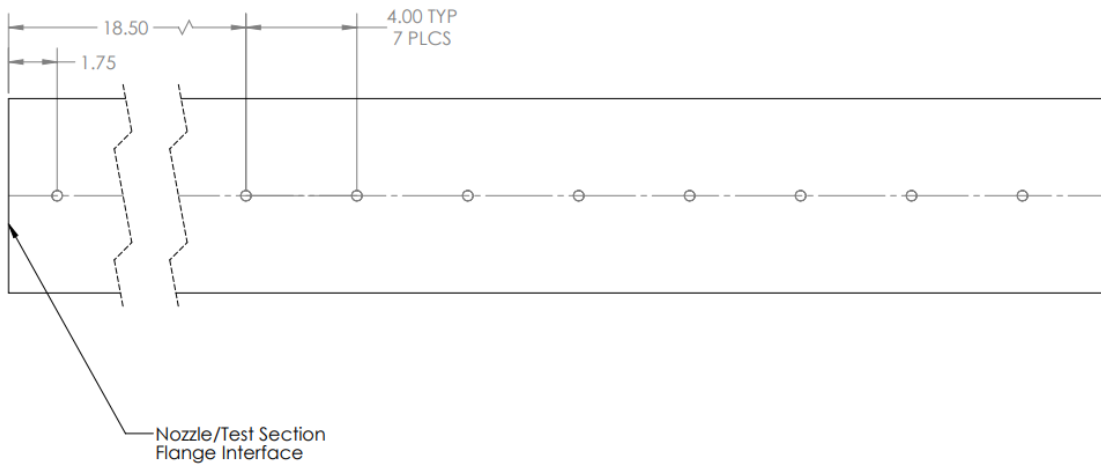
Pressure transducer locations along the wind tunnel floor.
